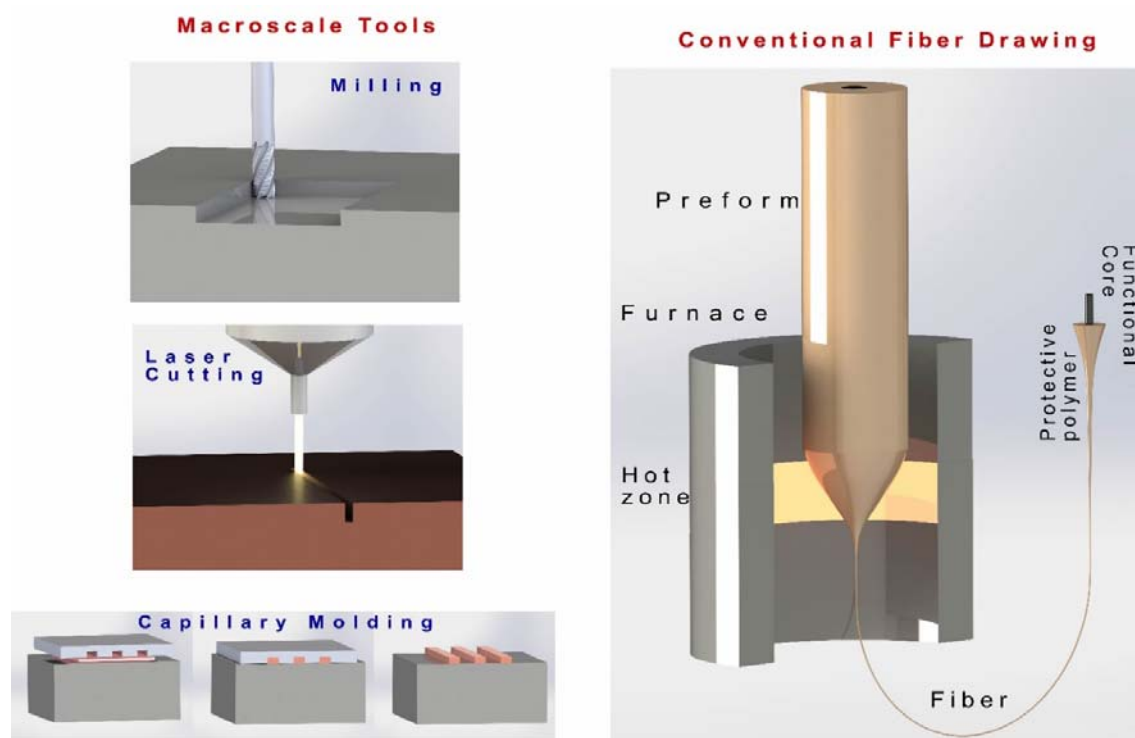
A conventional fiber drawing approach and macroscale machining of materials is shown. Laser cutter, CNC milling and molding are common methods to define macroscale features on the surface of materials. The conventional fiber drawing approach utilizes a cylindrical fiber geometry where the outer polymer region supplies flexibility and protects the functional core materials from fracturing (after or before drawing) or leaking/deforming (during drawing).
